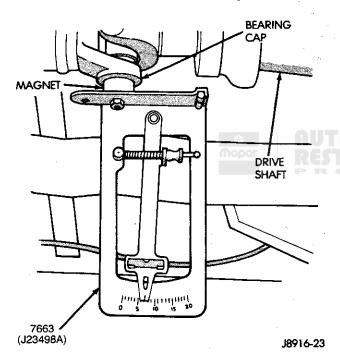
Transmission/Transfer Case Output Shaft Angle Measurement
